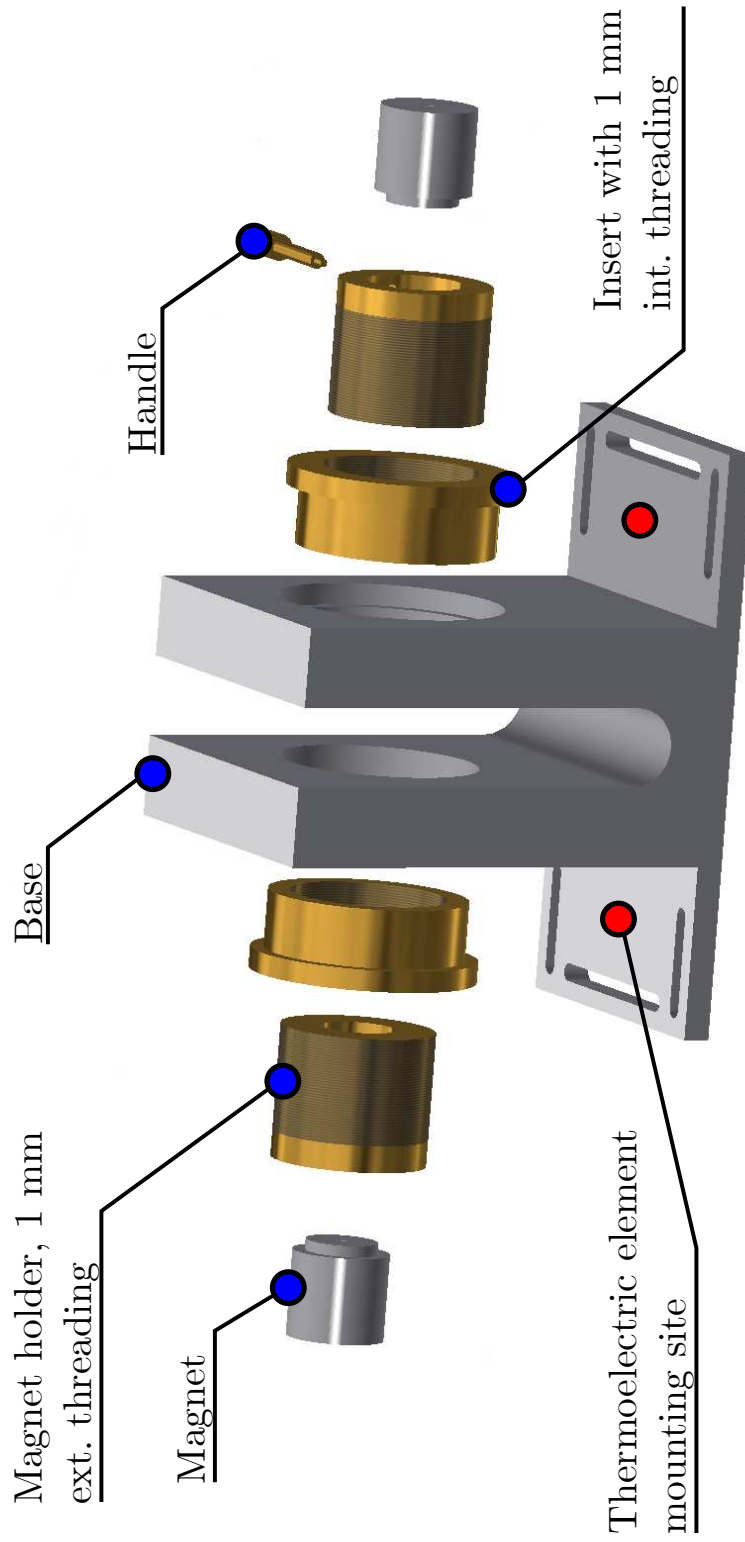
Explosion drawing of the magnet holder. From left to right: magnet (grey), magnet holder with 1 mm exterior threading (brass), magnet holder insert with 1 mm interior threading (brass), table mount (big grey object).
